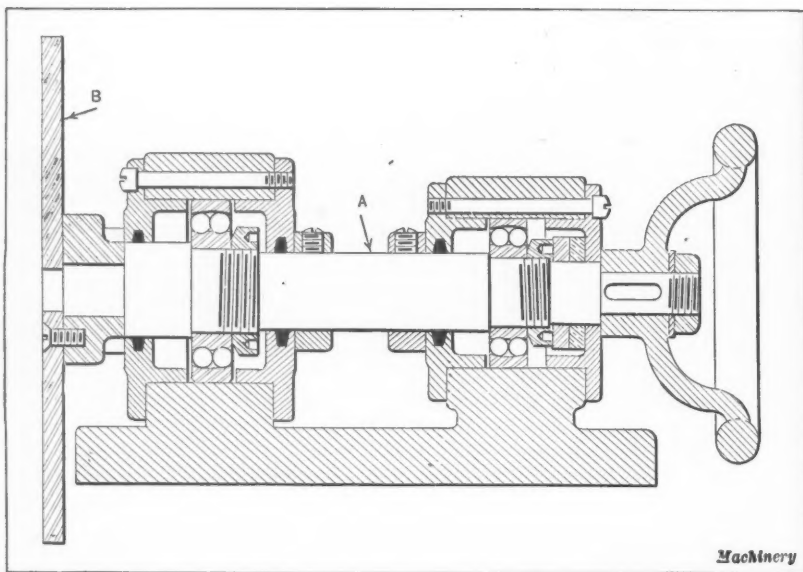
Special Fixture designed to permit Easy Rotation of Piston-rings while being ground
